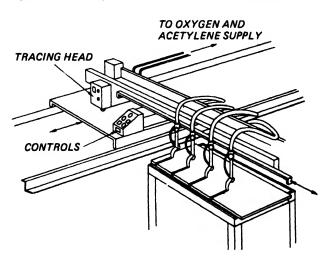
(a) Cutting machine fitted with four cutting heads.
